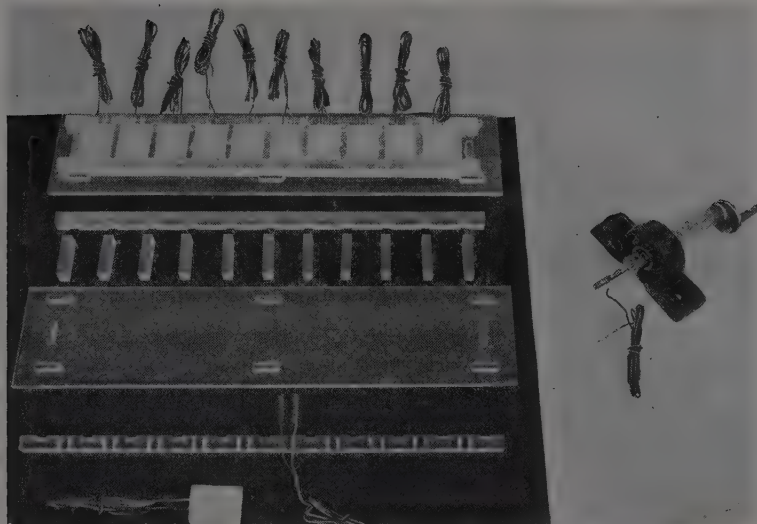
Helical coil electrode blocks showing electrode former, finished electrodes, the unassembled and assembled block molds.
